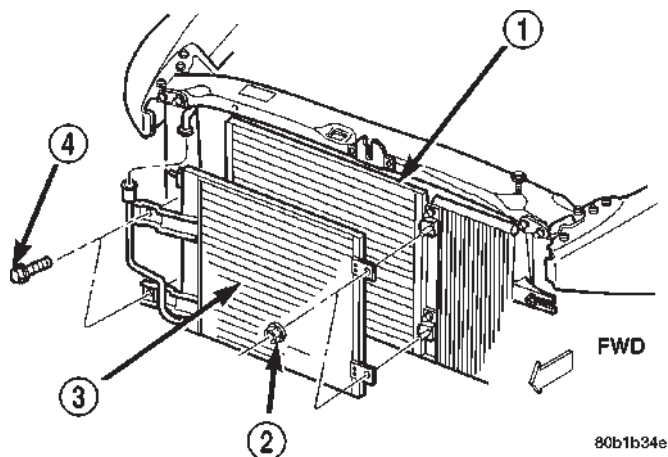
CONDENSER REMOVE/INSTALL - DIESEL ENGINE
